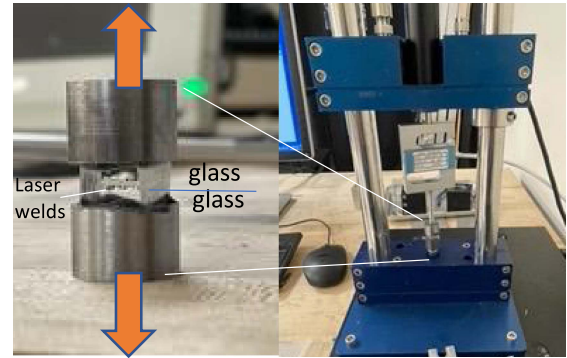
Glass/glass laser-welded sample glued to two metal cylinders for K_{Ic} measurement (left). Press to measure tensile force to weld breakage (right).
